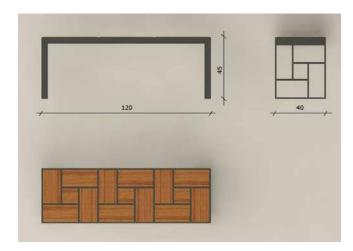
Ceiling Detail of the Emirhocazade Ahmet Bey House Fig.2 Endam-Bank / Technical Drawing Photography: Banu Apaydın's Archive – 2012
